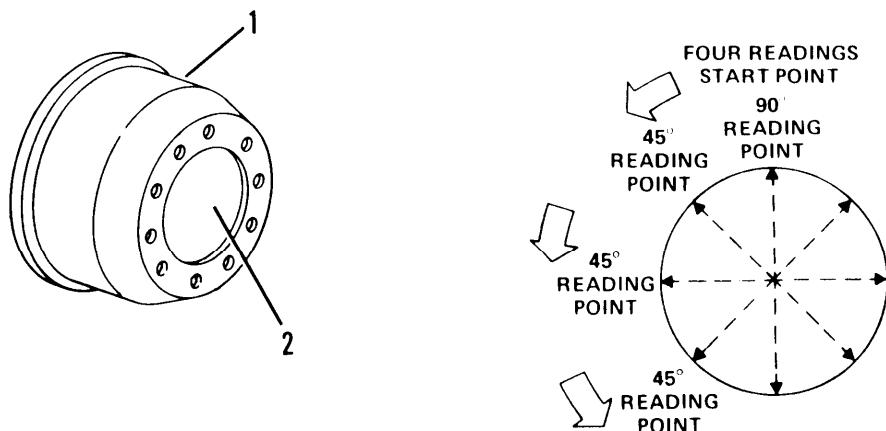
Checking Brake DRUM for Out-of-Roundness
